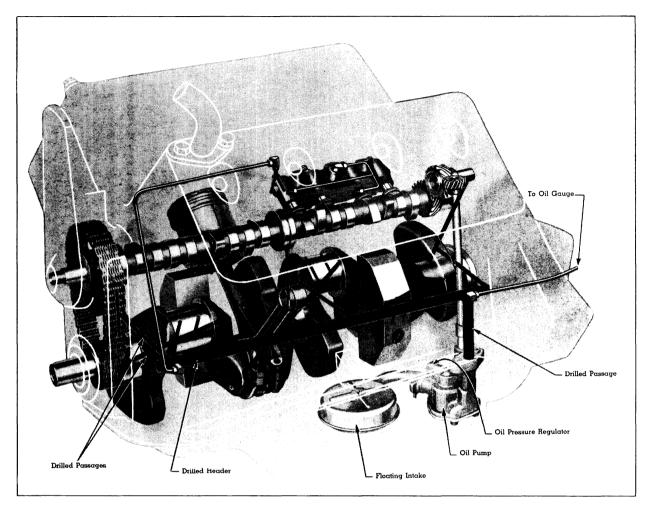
Engine Oiling System Series 40-50, 52, 62, 72, 60S and 75
